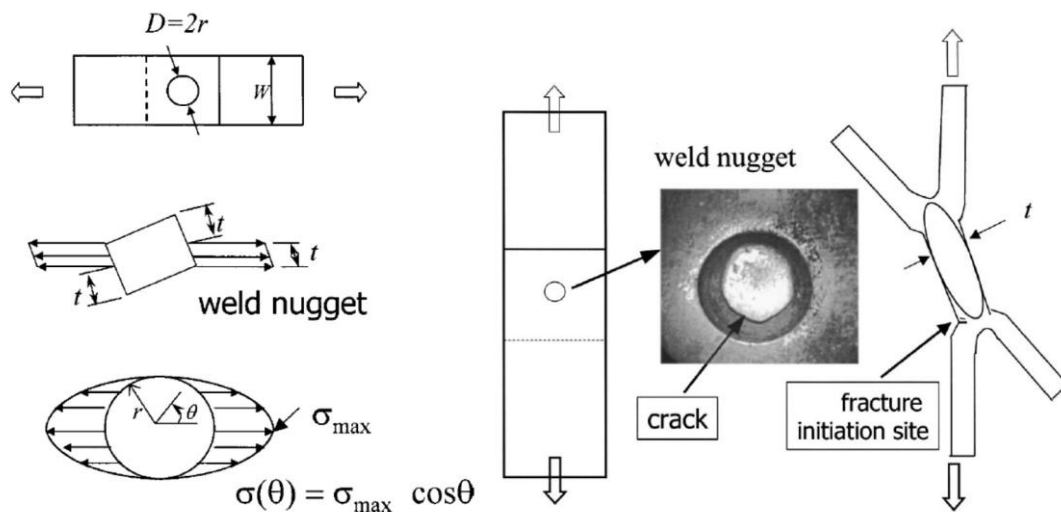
Stress distribution around the weld nugget in a lap-shear sample & Fracture initiation site of a lap-shear spot-weld sample [106].
